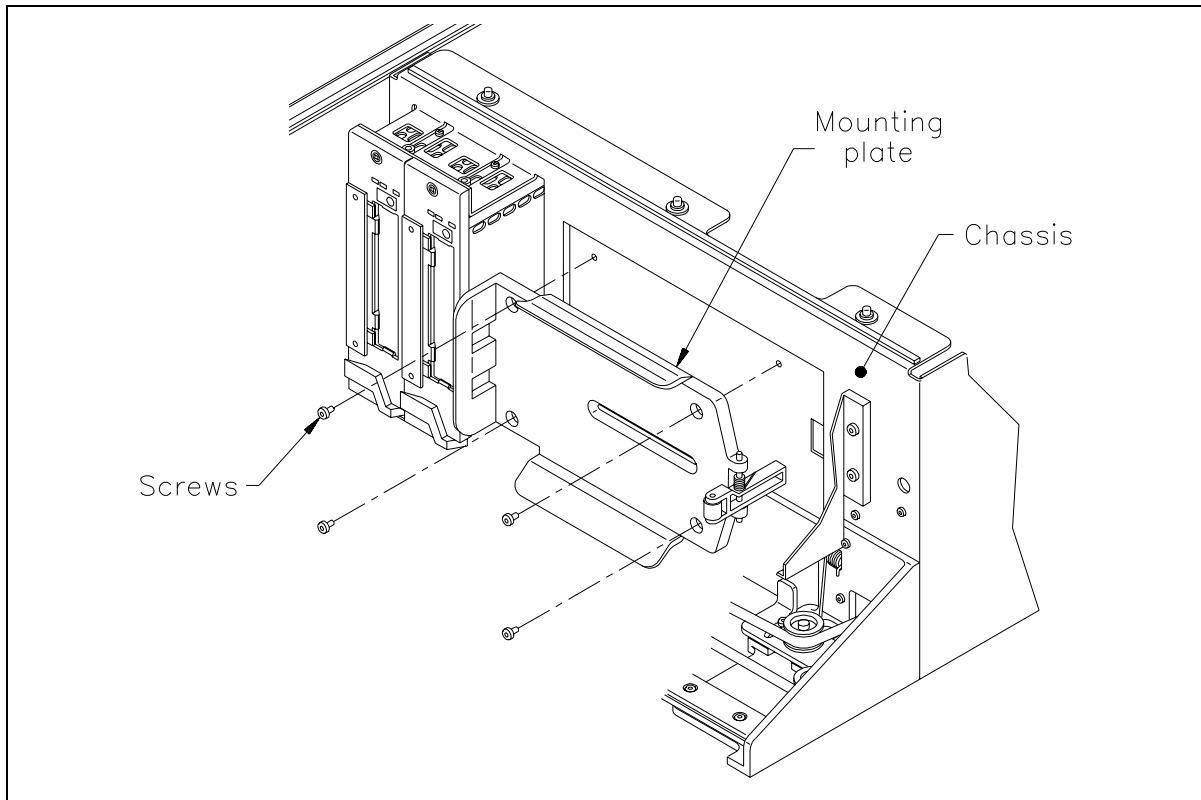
EXB-210: Removing the cartridge magazine mounting plate
